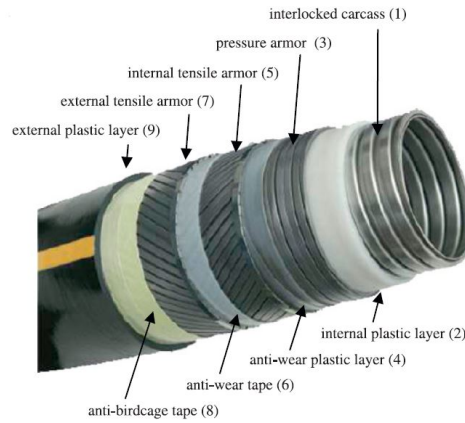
Typical flexible pipe cross-section, (Vaz & Rizzo 2011)
